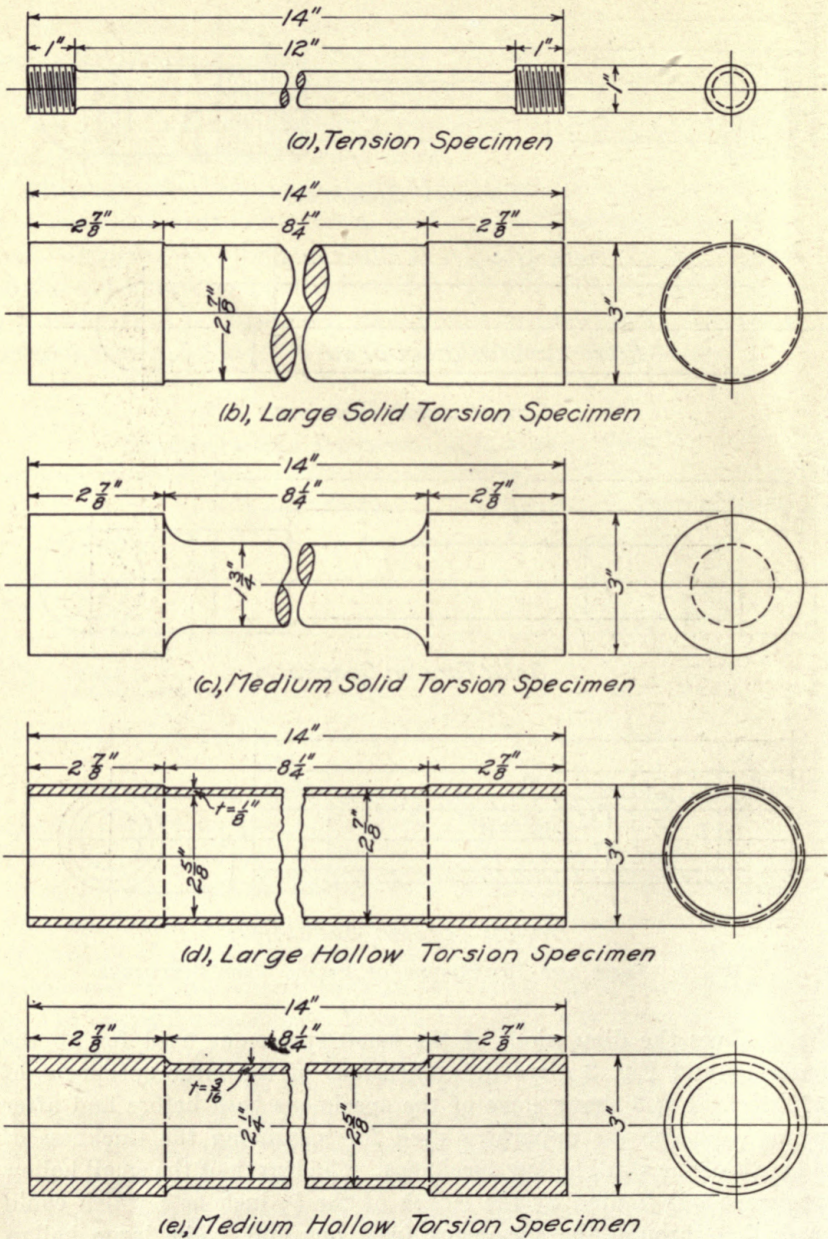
FORM AND DIMENSIONS OF LARGE TEST SPECIMENS
